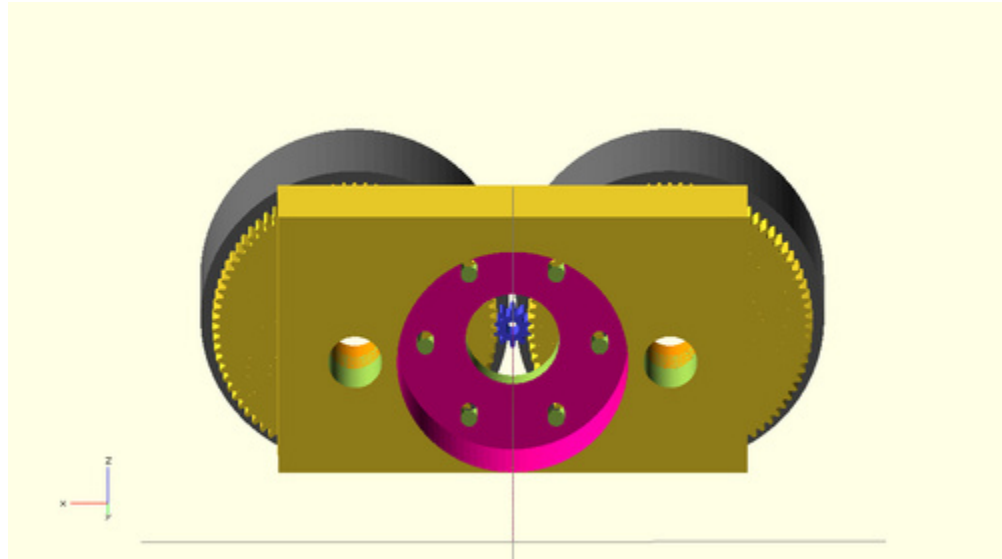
View of the complete transmission and wheel system including the motor mounts generated in OpenSCAD.
